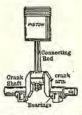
A single-throw crank shaft. Crank is set at 360°.
